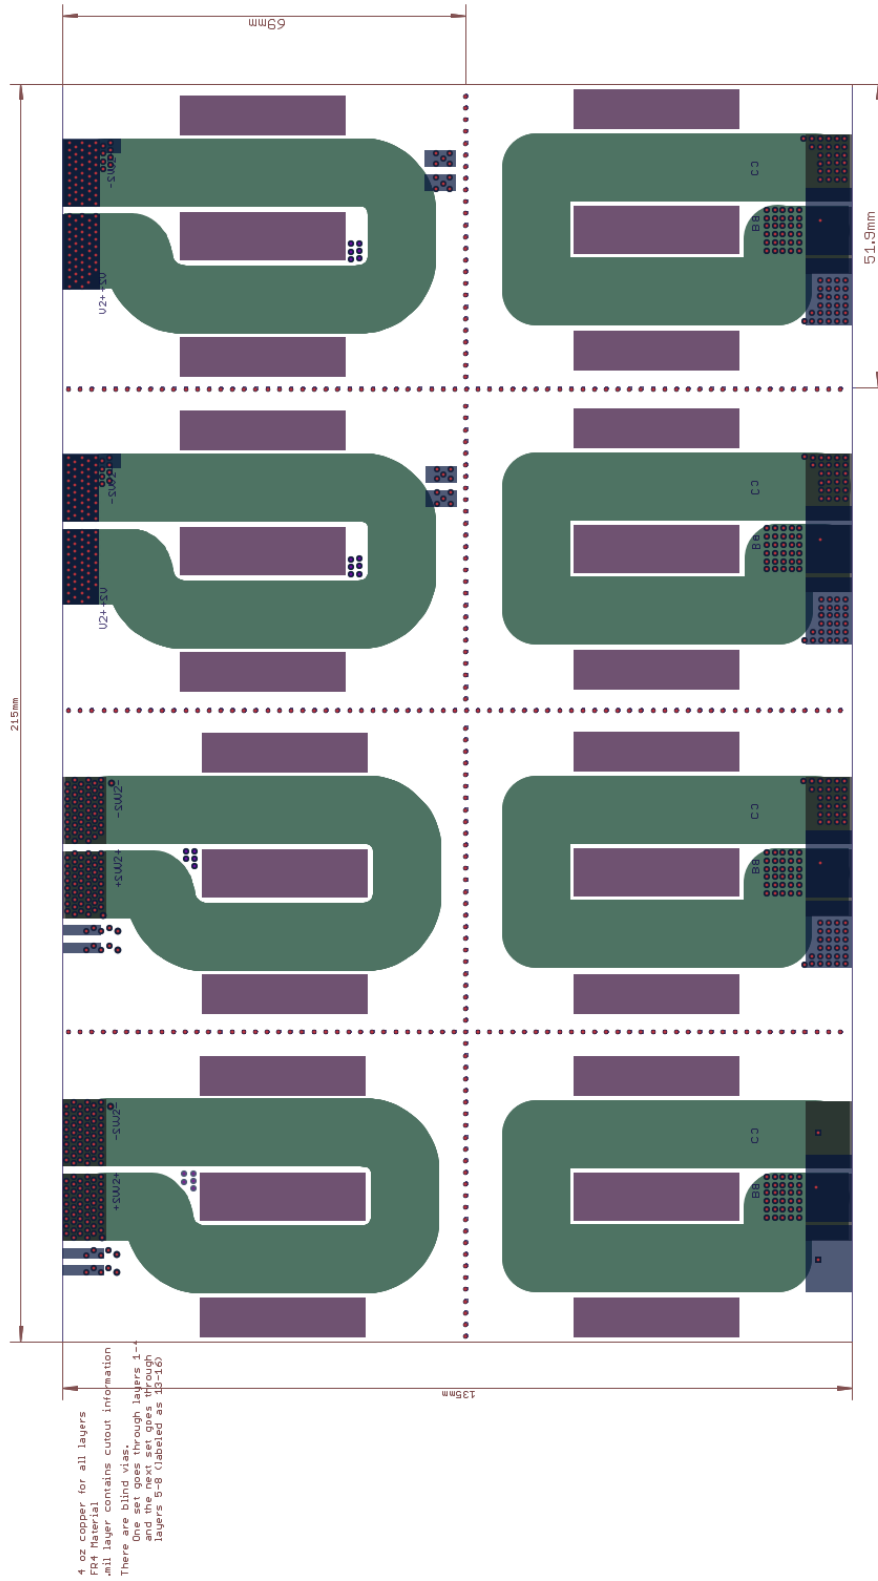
Layer 8 of the ICN transformer PCB winding (located in the top left) and other magnetic component variants. The purple rectangles indicate cutouts in the board.
